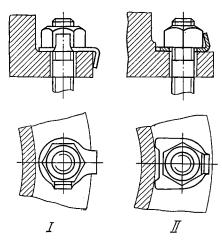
Setting tab washers on cylindrical flange I—incorrect; II—correct
